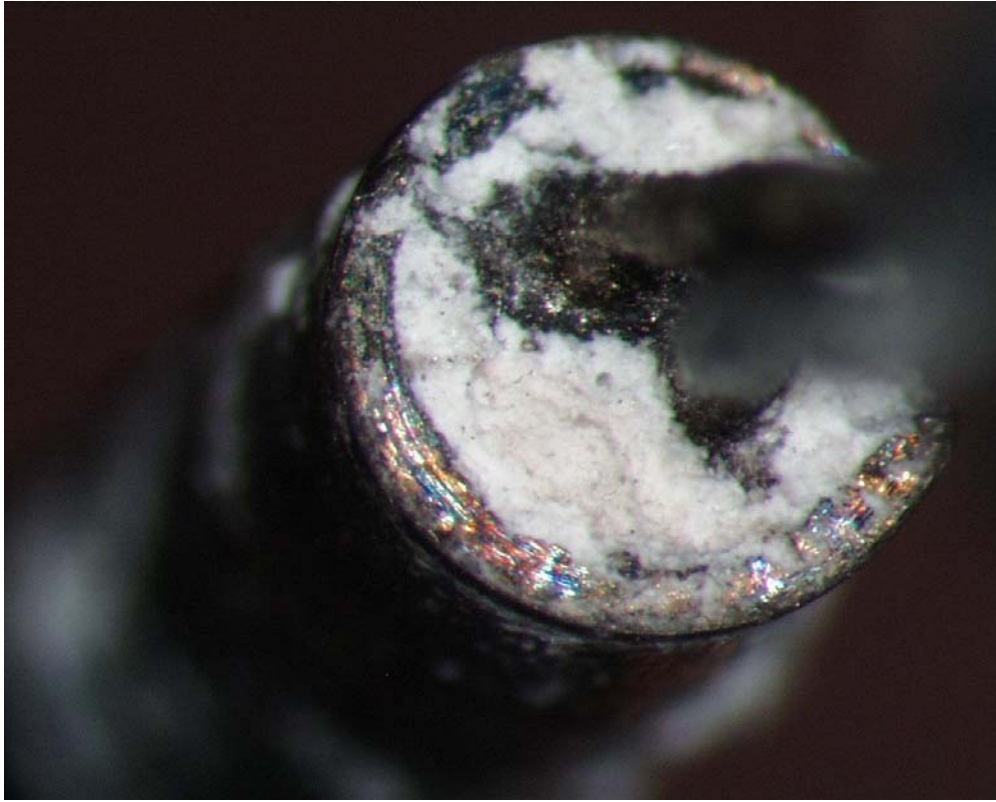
End View of Probe Showing Corrosion Product Permeating MgO Insulation
